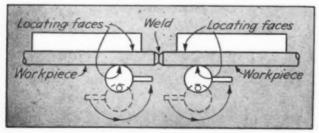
Eccentric clamps, quick in operation, make it easy to insert, lock and remove work from the jig.
